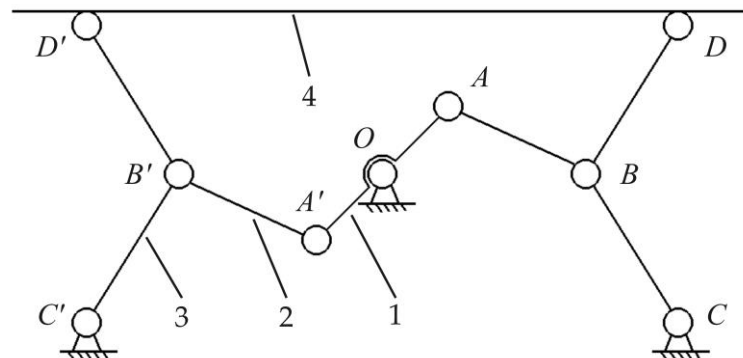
Schematic diagram of drive mechanism of die-cutting device. 1-crankshaft; 2-power rod; 3-drive rod; 4-moving platform.
